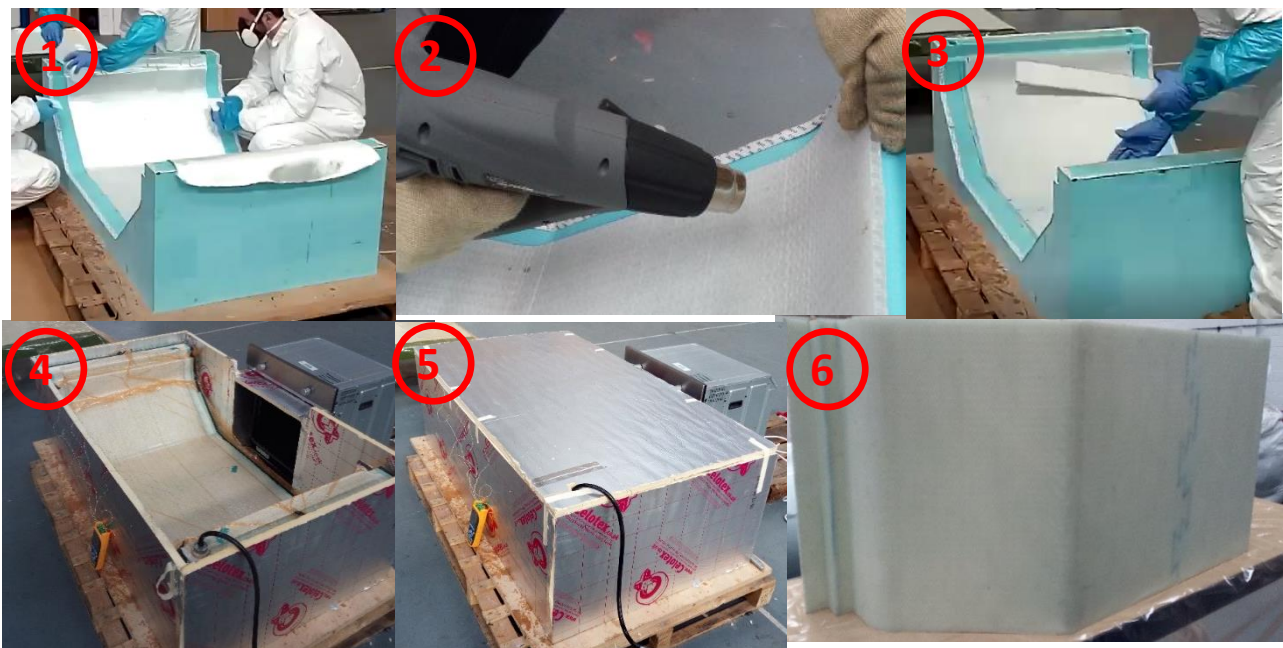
manufacturing of the sandwich version of the bulkhead. 1) E-glass dry fabric placement in the tool 2) thermoforming of the PP honeycomb core 3) placement of the honeycomb core in the bulkhead tool 4) the bulkhead bagged and under vacuum 5) curing of the part in the oven 6) final part after demoulding operation
